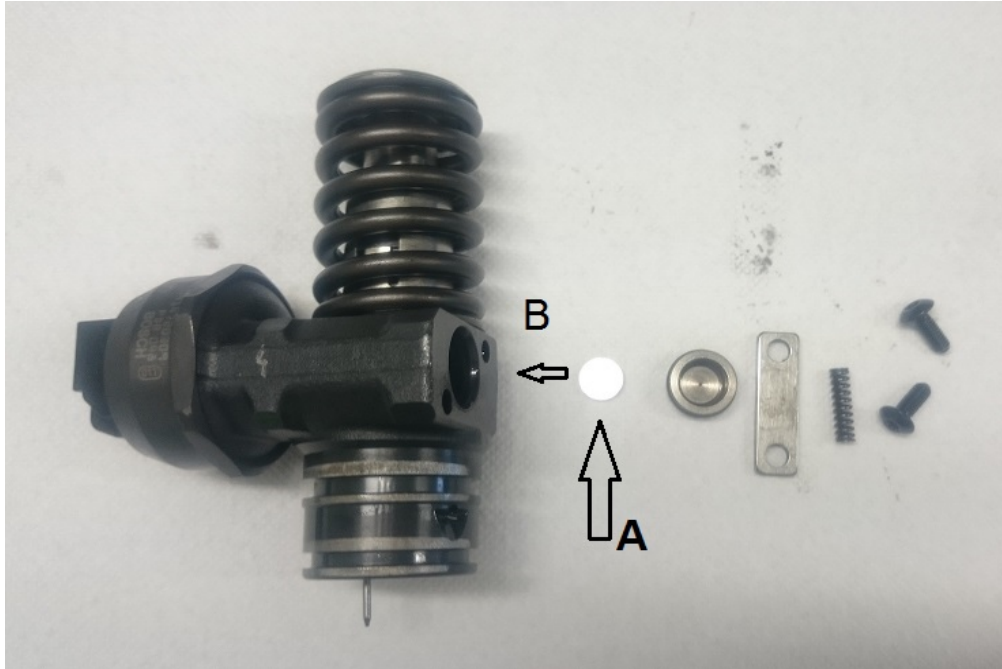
Possibility to adjust fuel injection dose volume in fuel unit injectors by changing the thickness of packing plate (A) in the solenoid section (B)
